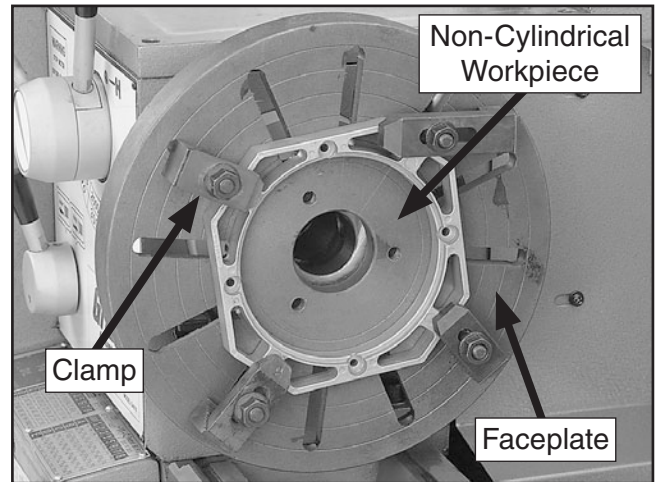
Example of a non-cylindrical workpiece mounted on a typical faceplate.
